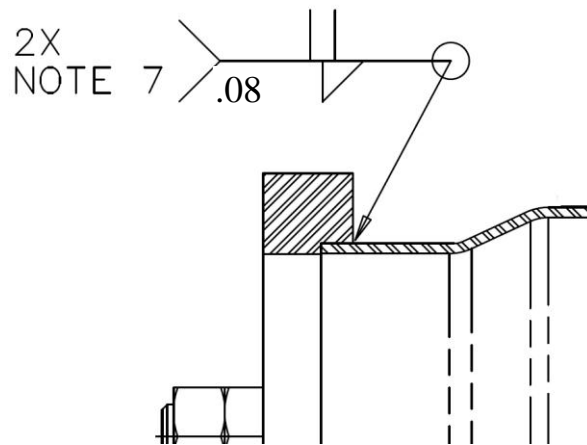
Weld Dimensions: Bellows-collars connection.
